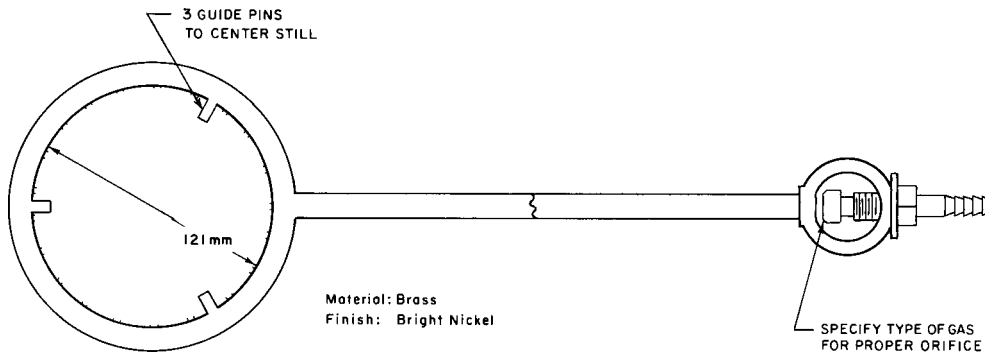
Ring Burner with 3/4-in. (121-mm) Inside Diameter
